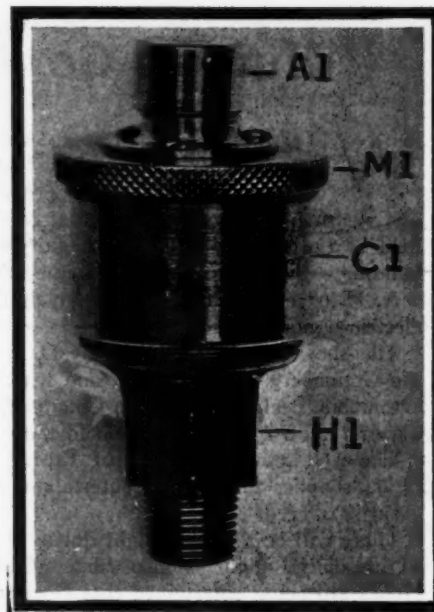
Showing arrangement of parts of the Tucker grease cup
